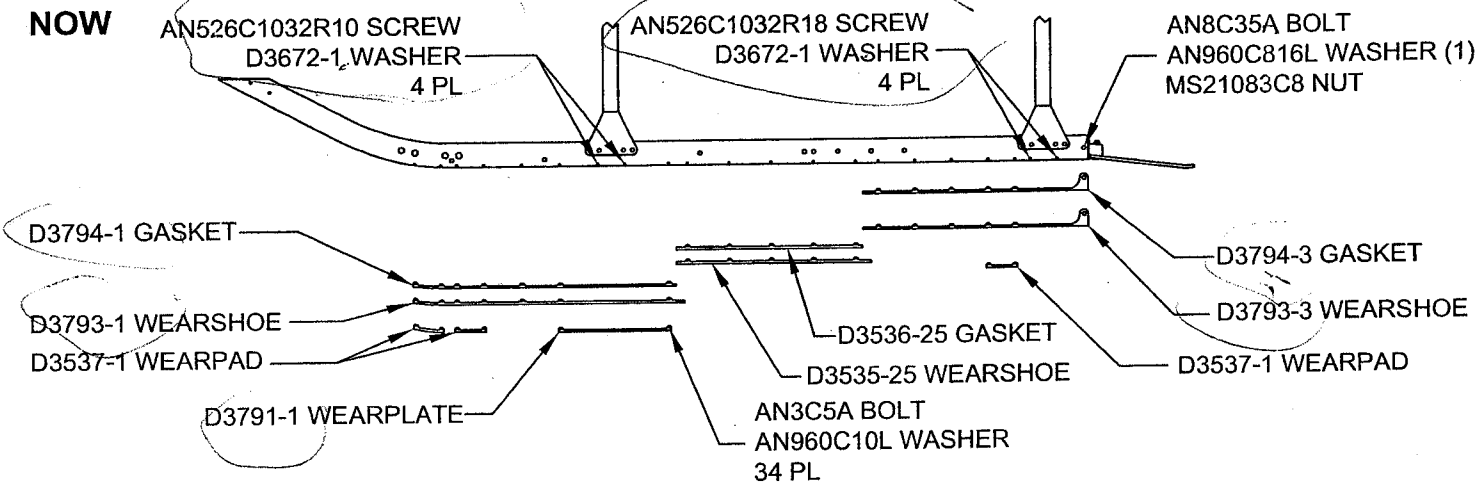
D350-636-011/-012/-013/-014 AT CHG 004 AND INSTALLATION OF DSI 9413-011
